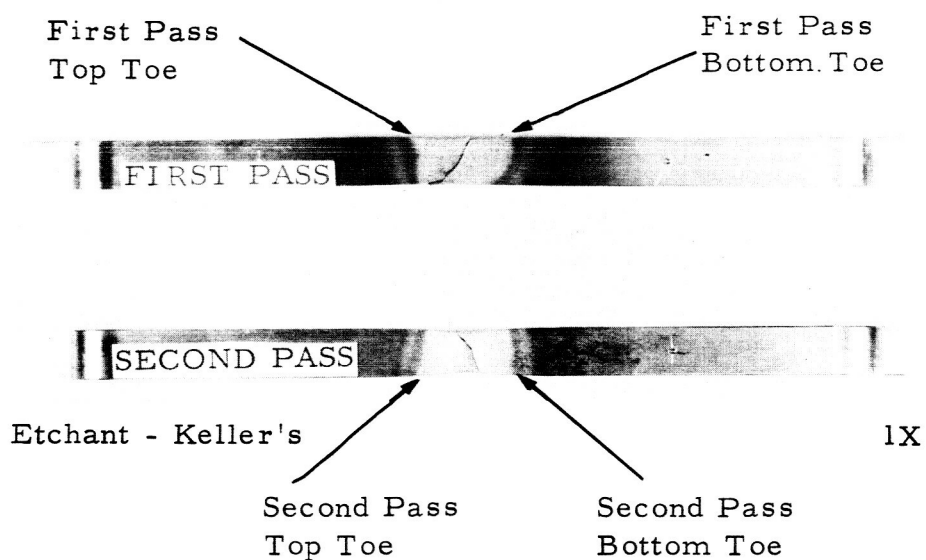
THE FRACTURE PATH IN ADJOINING FIRST AND SECOND WELD PASSES WHEN TESTED AS SEPARATE TENSILE SPECIMENS
